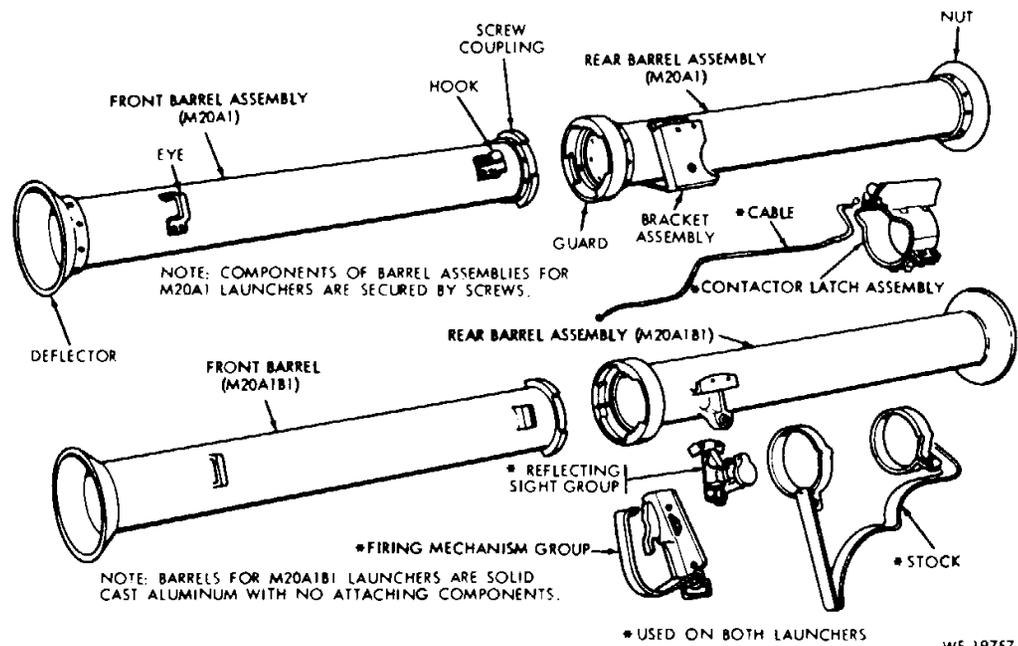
3.5-Inch Rocket Launchers M20A1 and M20A1B1-groups and assemblies.
